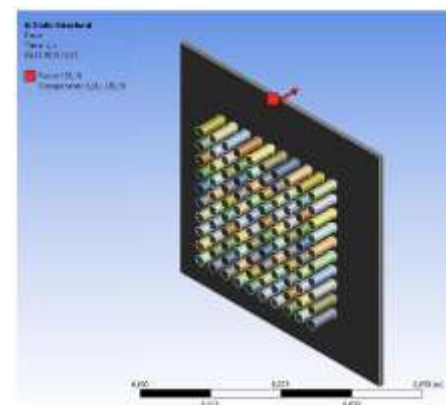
Midspan Force acting on Workpiece for  $\varnothing 2$  mm Array Configuration
